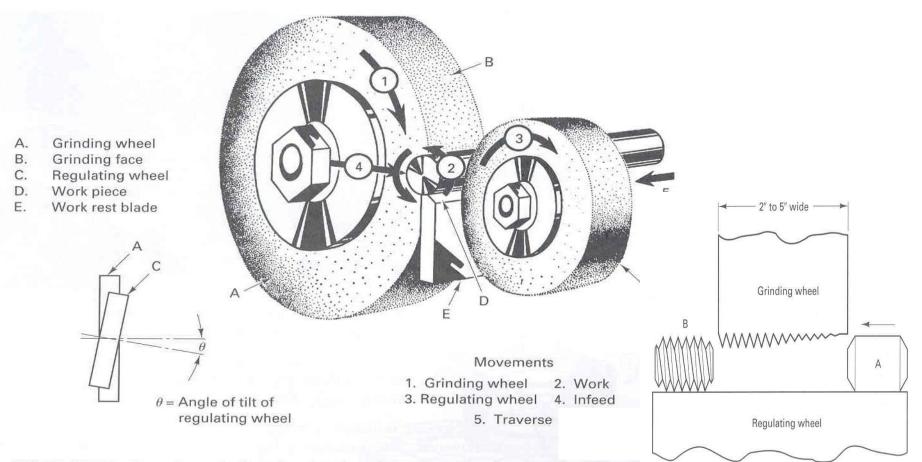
Centerless grinding showing the relationship between the grinding wheel, the regulating wheel, and the workpiece in centerless method. (Courtesy of Carborundum Company.)
